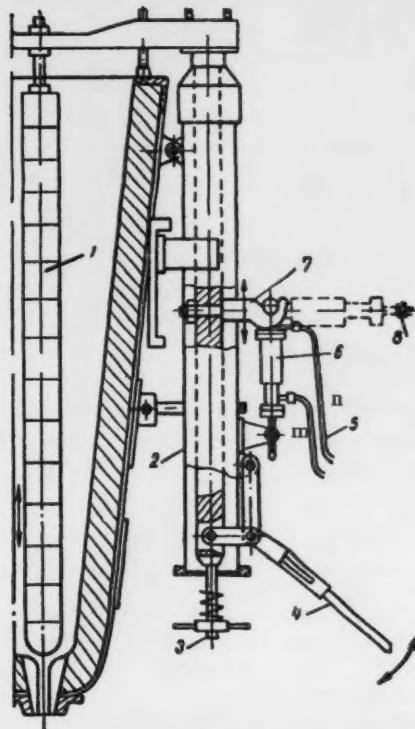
Method of mounting the working cylinder on the ladle stopper mechanism: 1) Stopper; 2) barrel; 3) mechanism rod; 4) shank and handle for manual control; 5) high-pressure flexible tubing (oil supply and discharge); 6) working cylinder; 7) hook; 8) position when mounting.
